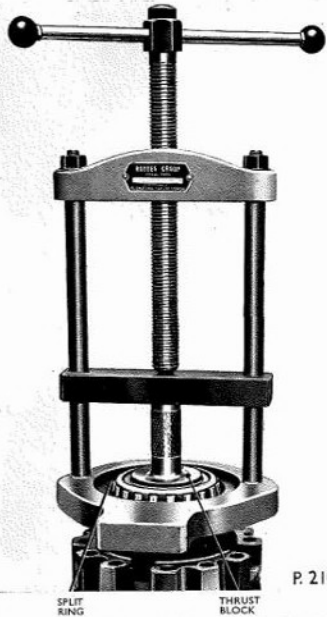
Withdrawing the bearing cone from the differential case, using the Churchill Tool R.G.4221B and the adaptor set R.G.4221B-15
